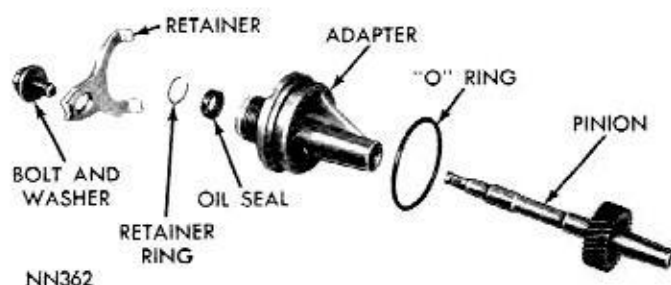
Speedometer Pinion and Adapter—Disassembled
